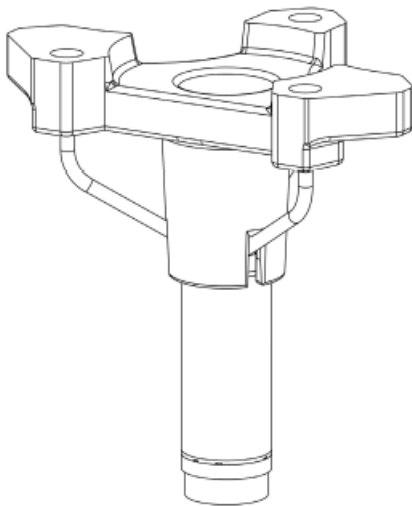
WSS 7xx sensor with protection cap still mounted.
